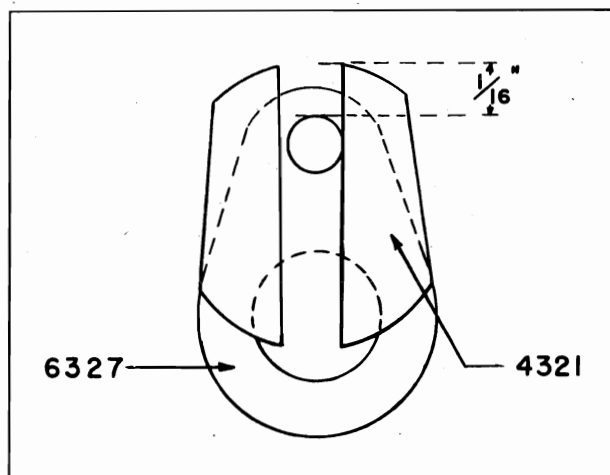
FIGURE G. REVERSE PINION CRANK AND PIN ASSEMBLY
